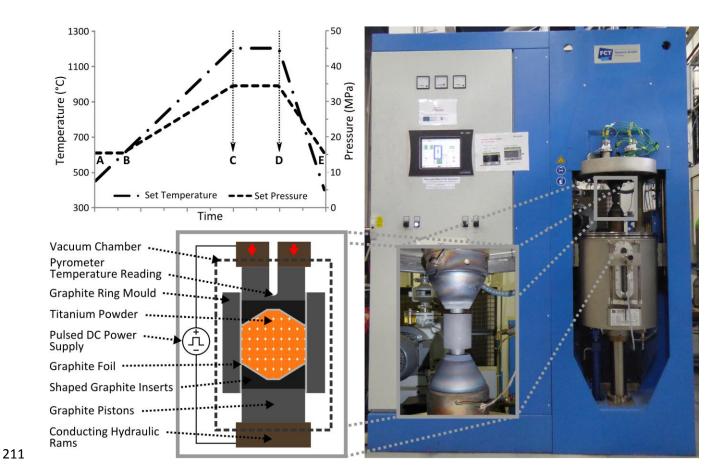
Photograph of the FCT Systeme GmbH Type HP D 25 FAST Furnace at The University of Sheffield (right); showing detail of the graphite mould assembly held between the conducting hydraulic rams (inset right).
